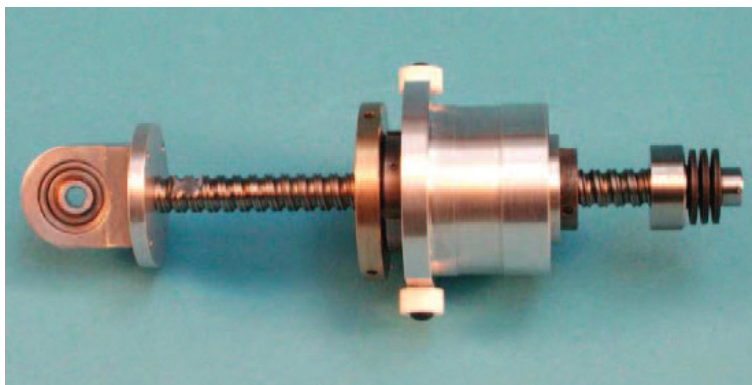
Screw-ball type mechanical inerter prototype developed in Cambridge University Engineering Department[5]
